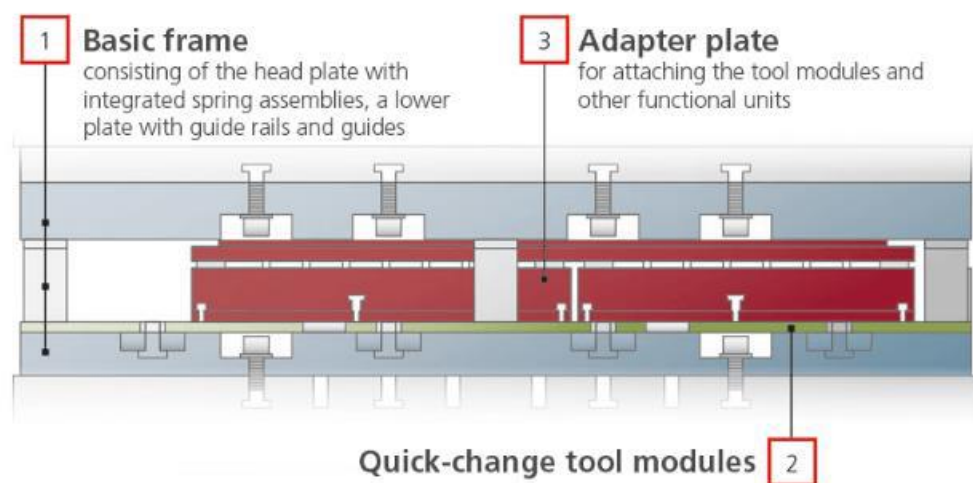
Modular tool 3 design stages. 1 – Basic frame, 2 – Adapter plate, 3 – Quick change tool modules [12]
